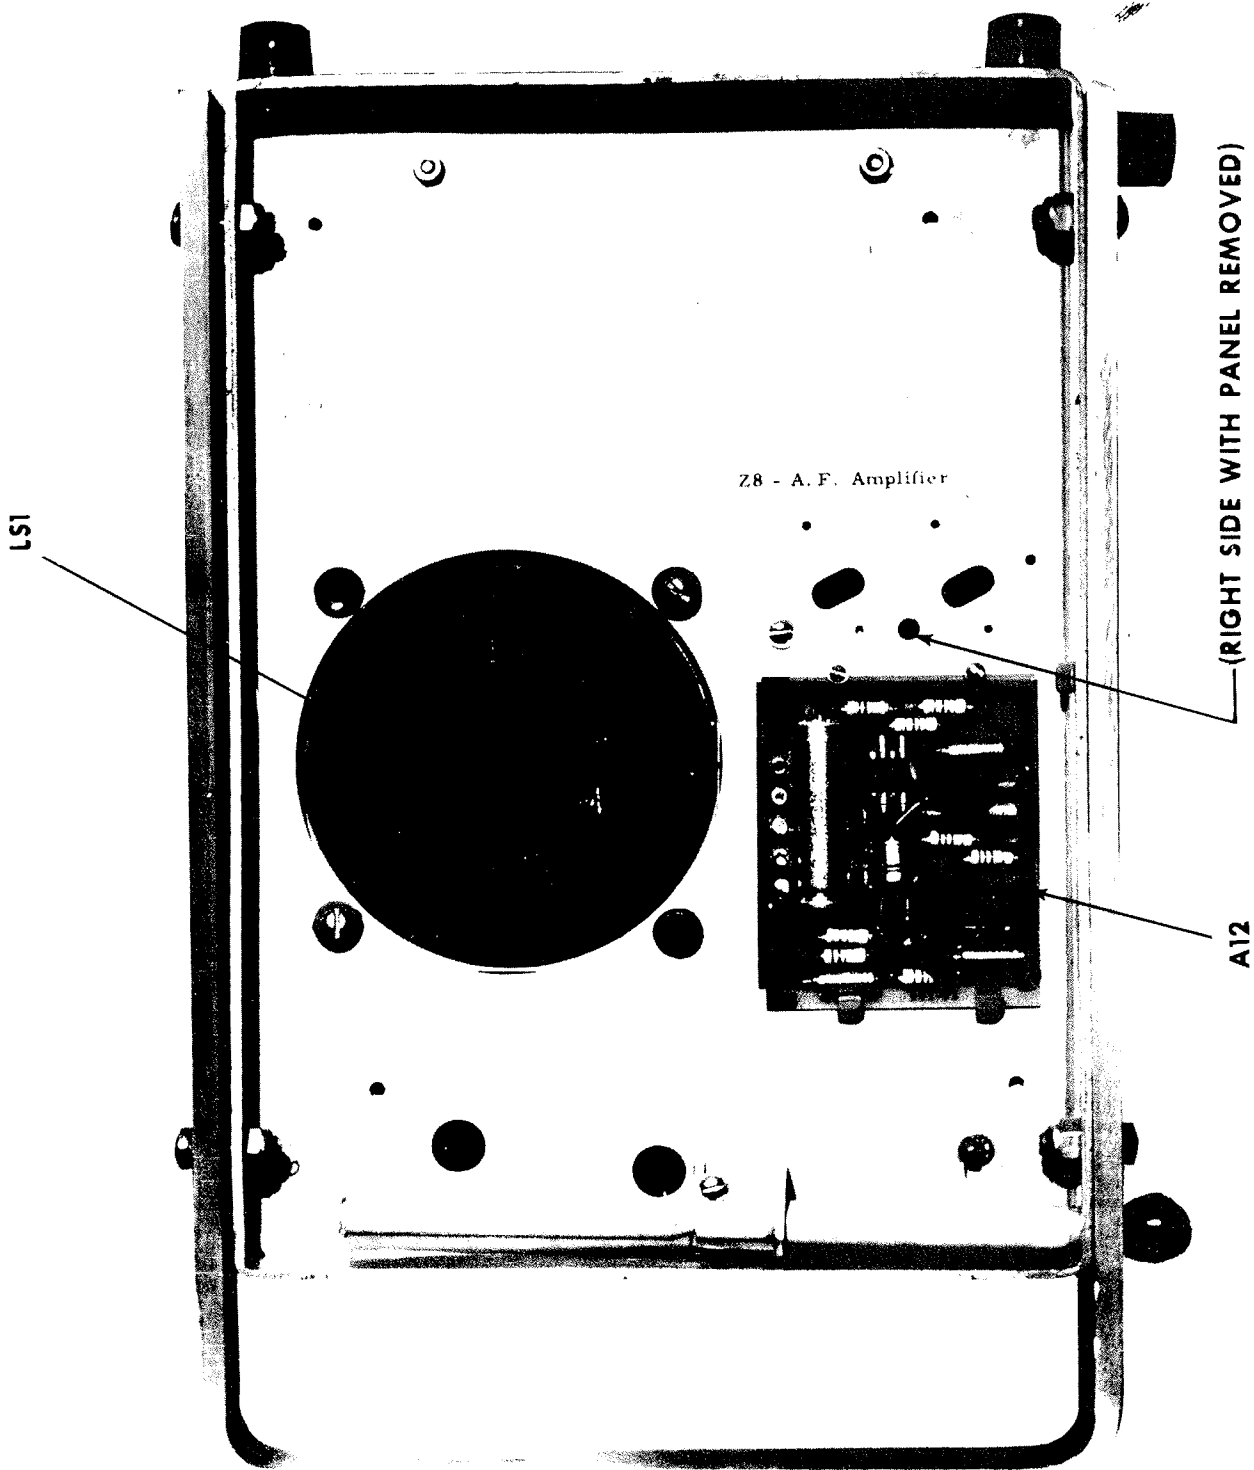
Type 107B Digital Frequency Meter/Signal Generator, Subassembly and Parts Location (Sheet 3 of 5, Right Side View)
